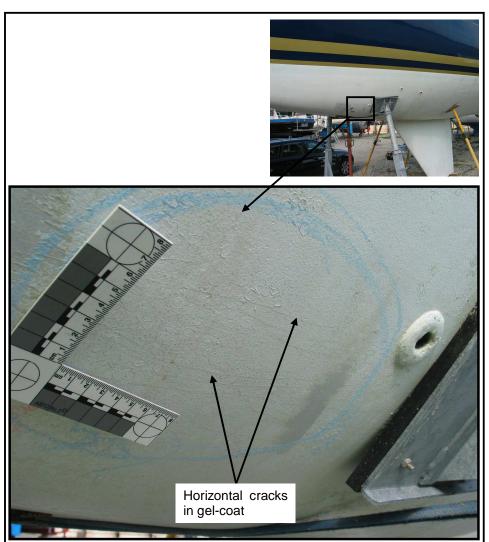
Cracks to gel-coat, port side, forward quarter, just forward of heads sink outlet
